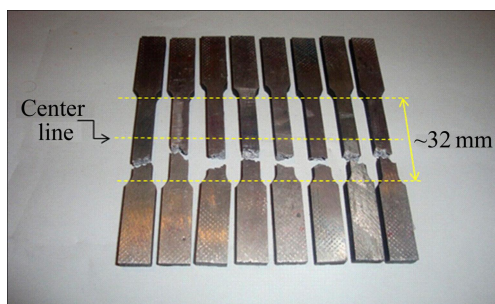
Photograph of tensile test specimens welded under different conditions
